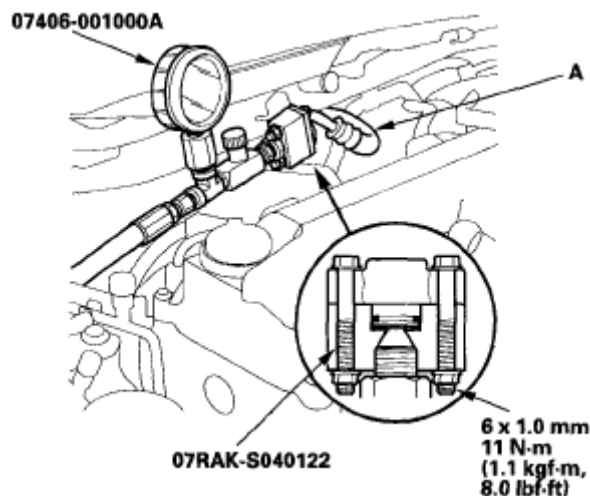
Identifying P/S Pressure Gauge To P/S Joint Adapter (Pump) (With Torque Specifications)
